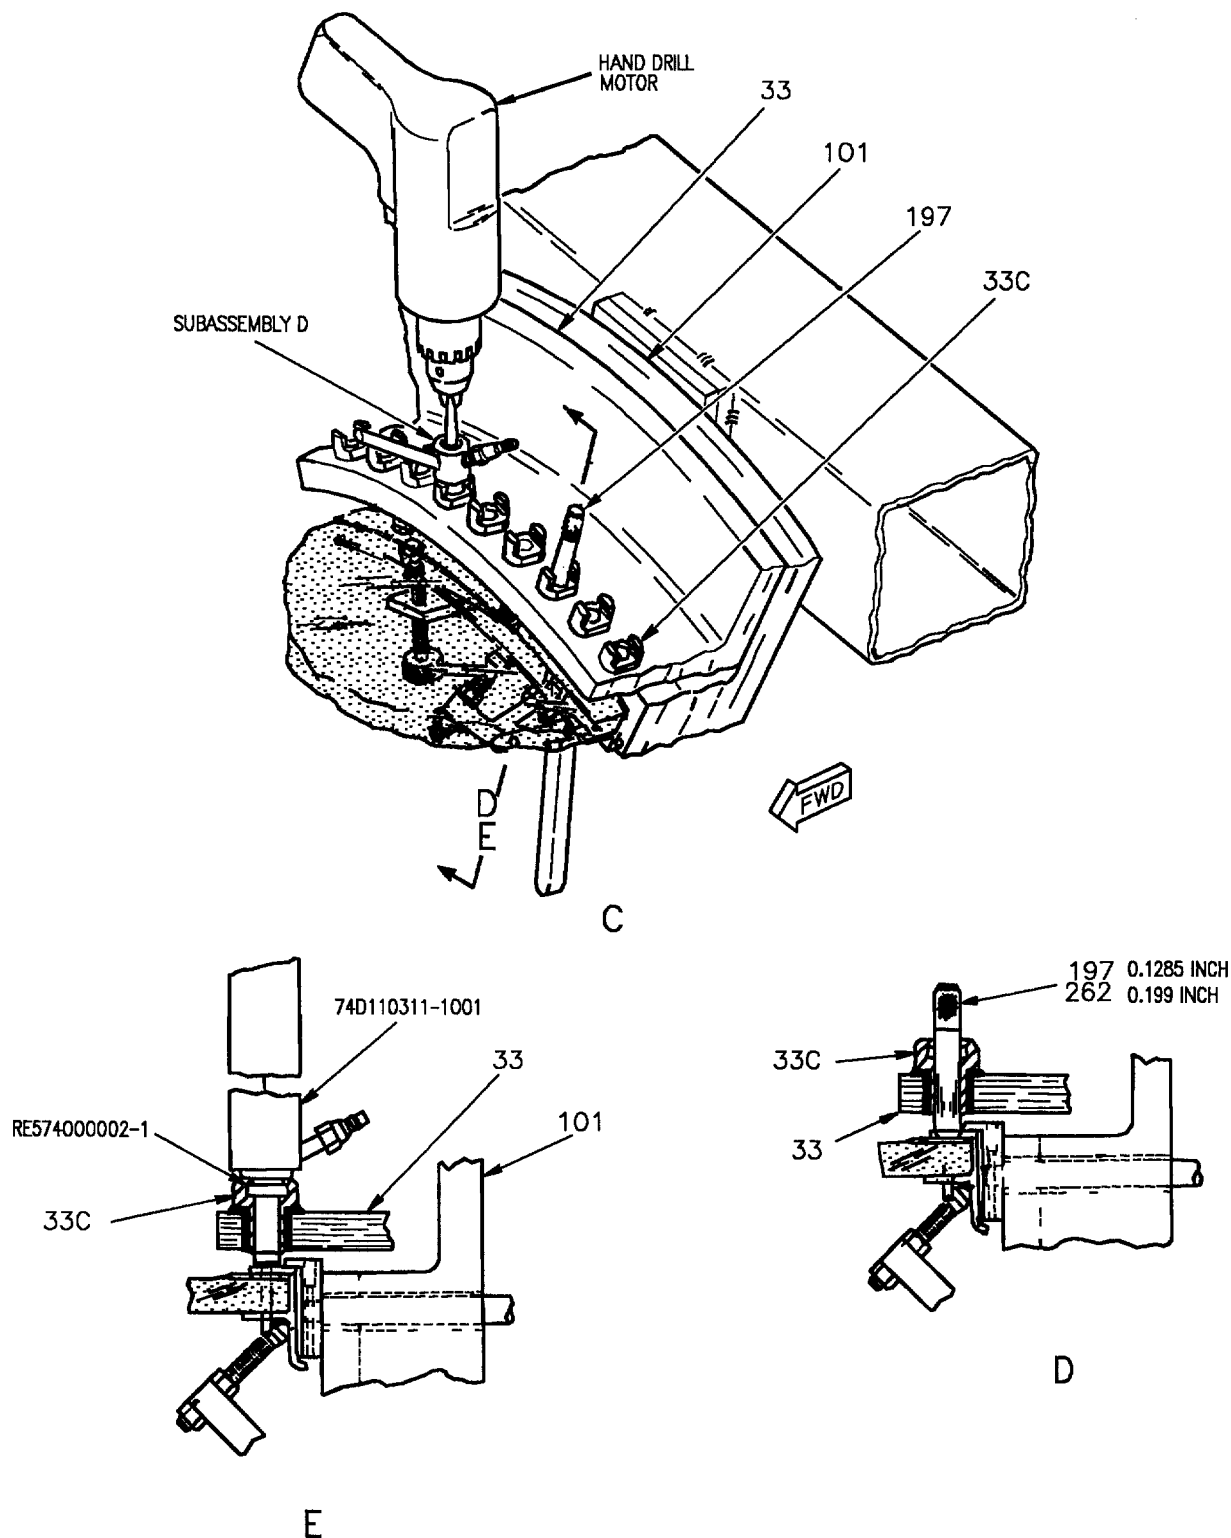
Drilling New Transparency and Structure (Sheet 3)
